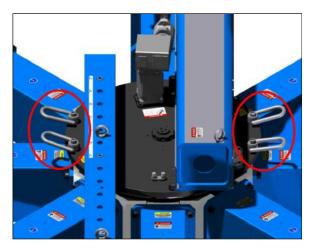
ASSEMBLED MACHINE LIFTING POINTS
